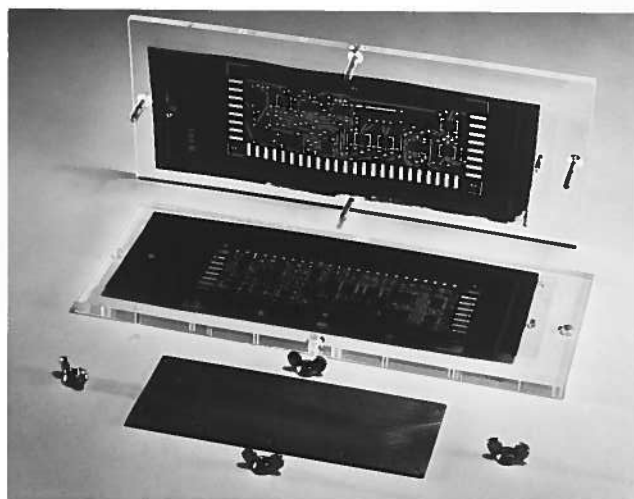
Plate III Top and bottom views of board types in Engineering and Flight Model 1
